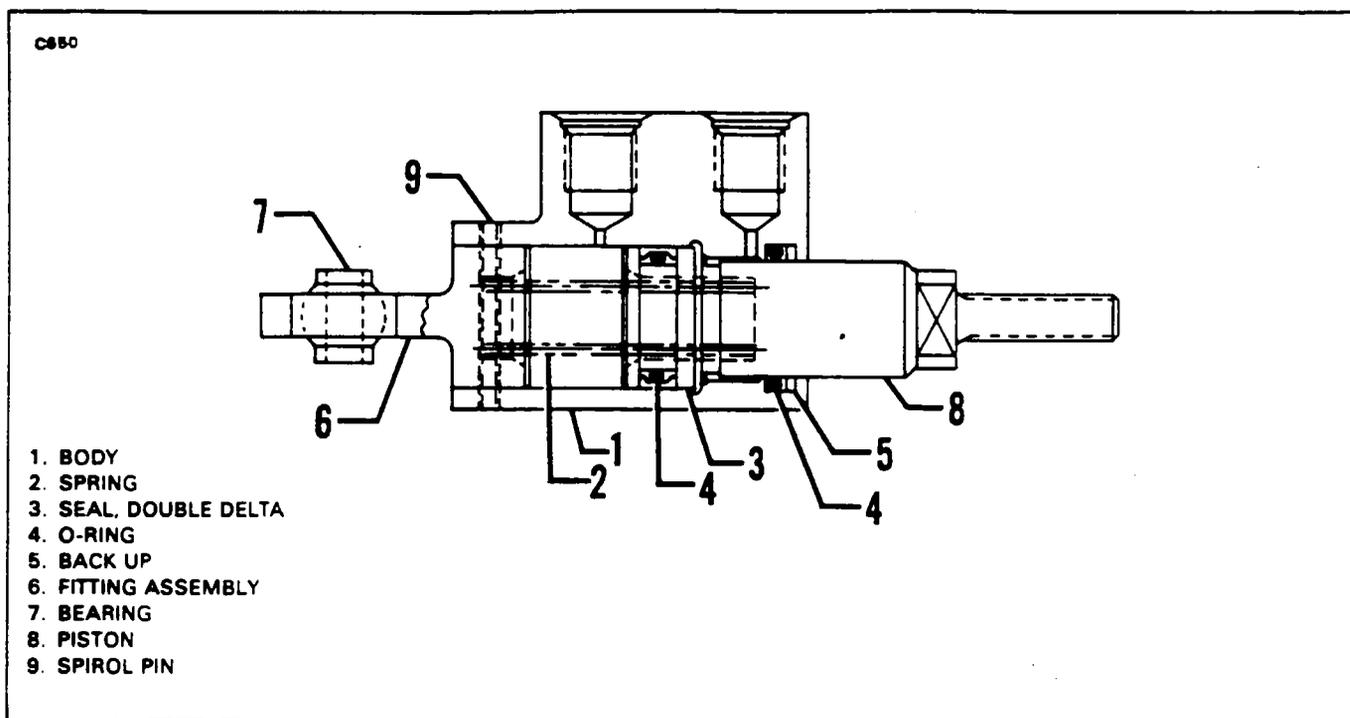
Unlock Actuator (Wiebel Tool WTC 2215)
